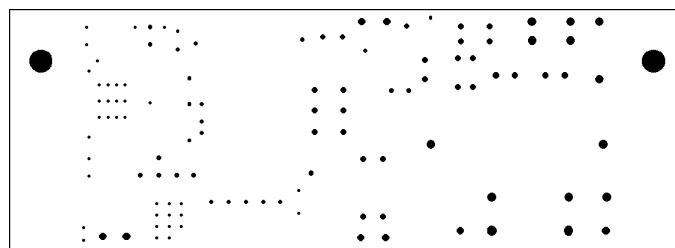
PCB Drill Drawing Top/Bottom Layer (Scale 1:1)
